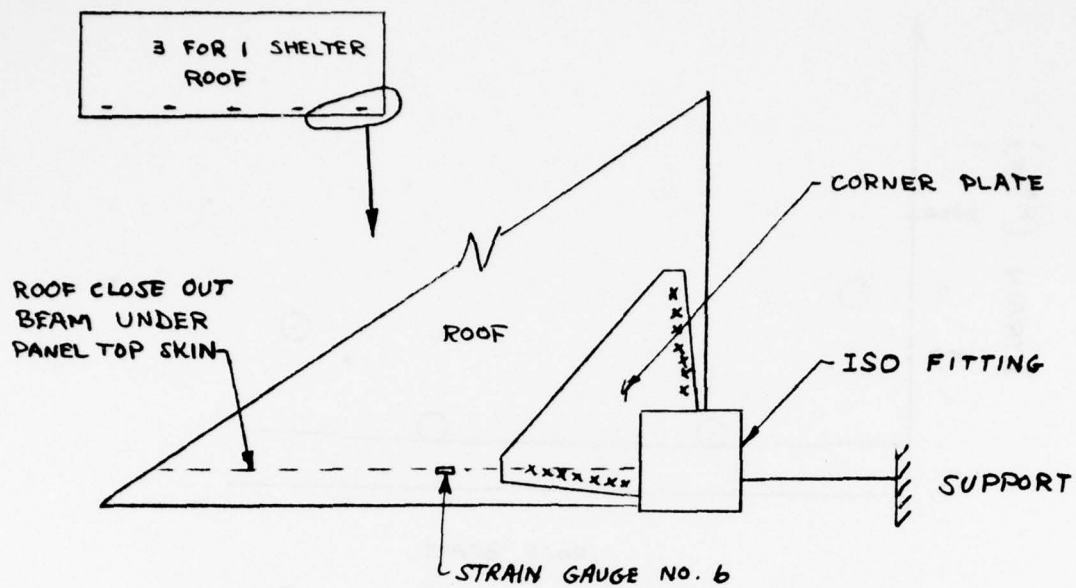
LASHING DETAILED VIEW OF ROOF NEAR ISO FITTING.
